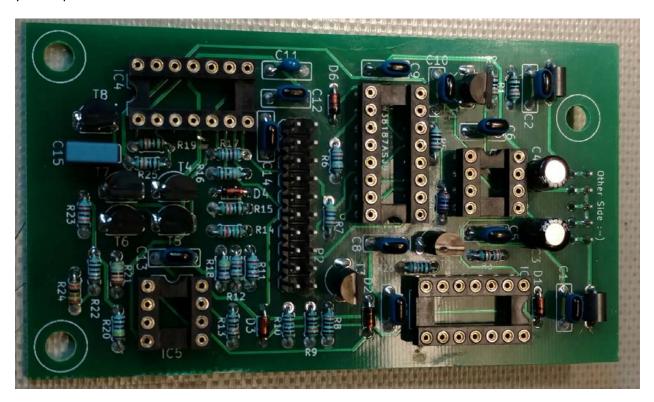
Assembled BACK PCB. Mount T1 - T8 close to the board
